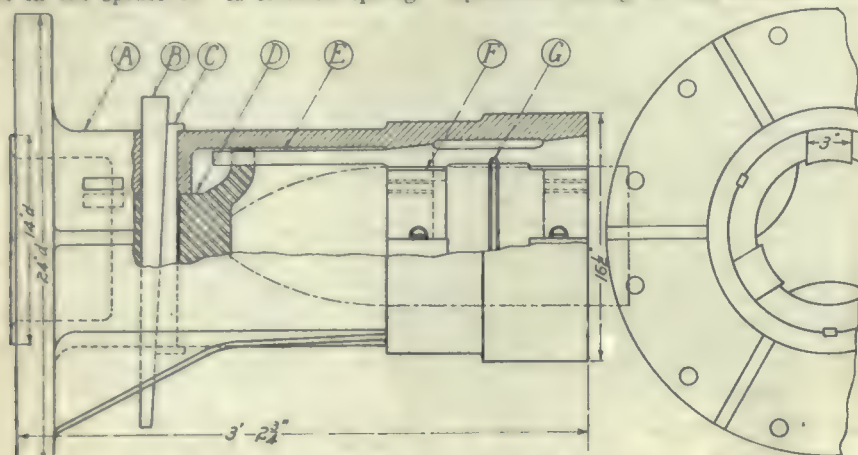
HEAVY THREE-JAW CHUCK FOR SHELL BORING.
